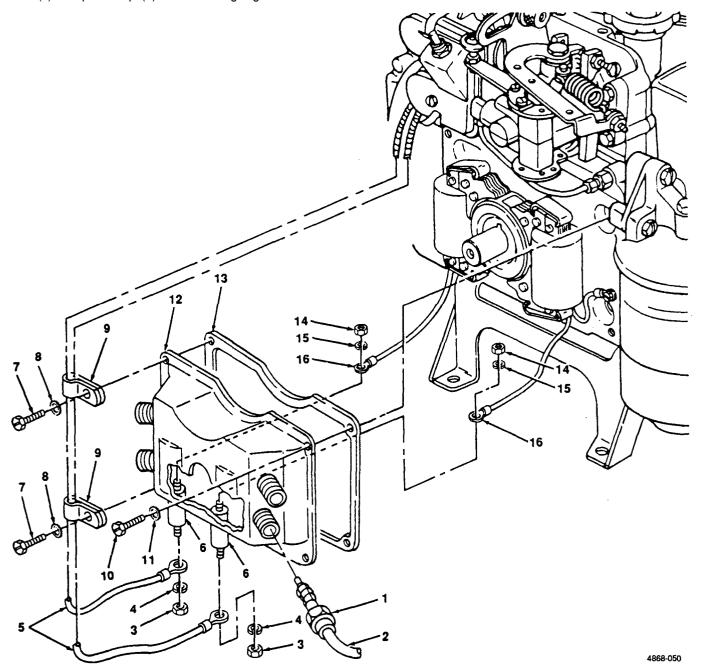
Coil Cover (Breaker Point Ignition), Removal and Installation.
